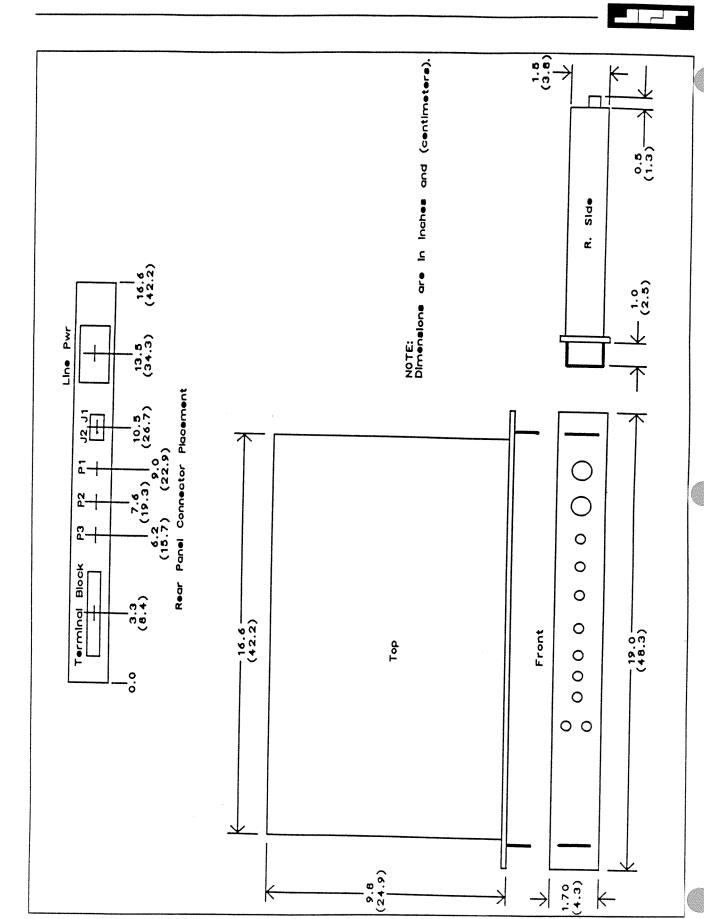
Outline Dimensions and Rear Panel Connector Placement
